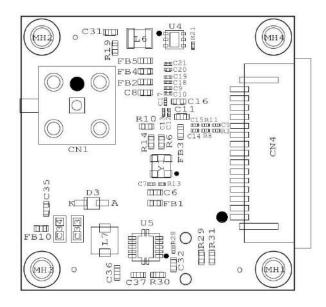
NileCAM20_CUNX Deserializer Board Rear View
